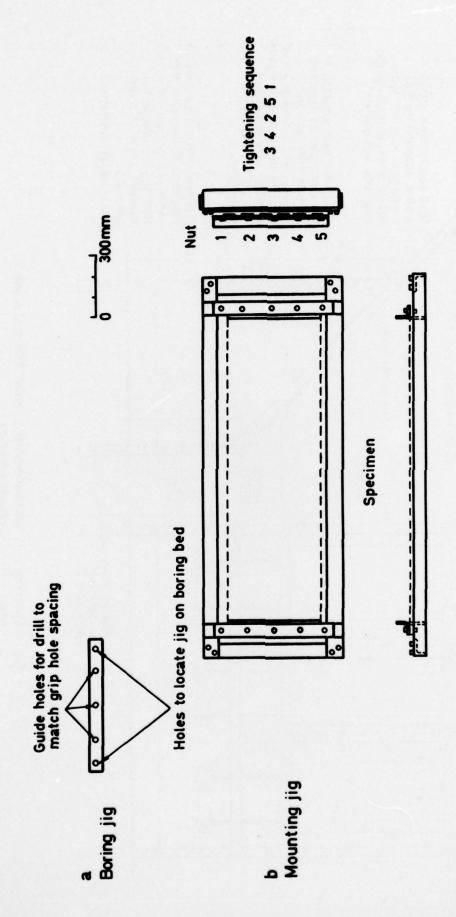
Jigs for drilling and mounting specimens (from ERDE trial schedule)
